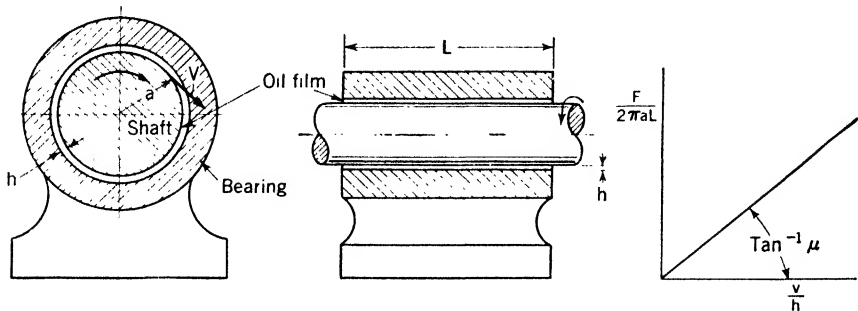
Oil viscosity causes shearing stress on the shaft of a flooded journal bearing.
